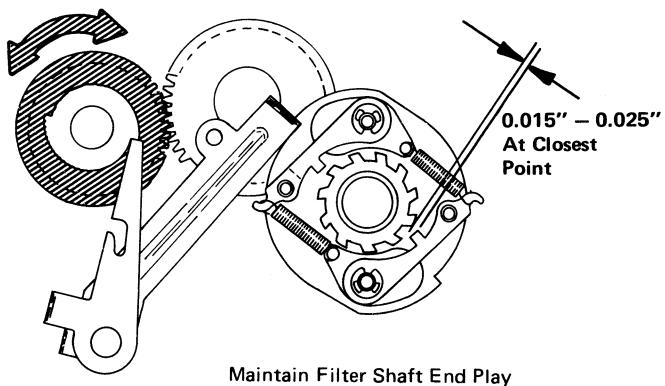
Filter Shaft Clutch Pawl Clearance
